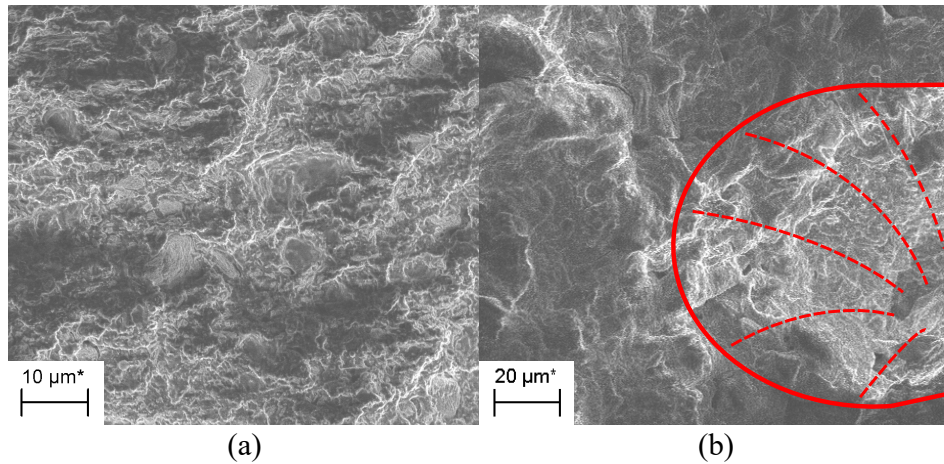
SEM micrographs of the fractured surface of a notched test specimen. (a) Representative area of the fractured surface, pictured with a magnification factor of 726. (b) Fracture surface in area where it is likely that failure initiated, pictured with a magnification factor of 357.
